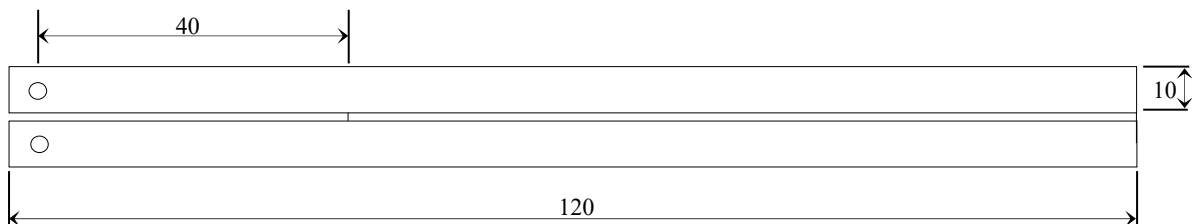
Geometry of the DCB specimens (dimensions in mm).
